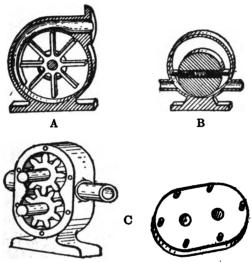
A, Centrifugal Pump; B, Valve Pump; C, Grar Pump and Cover.
